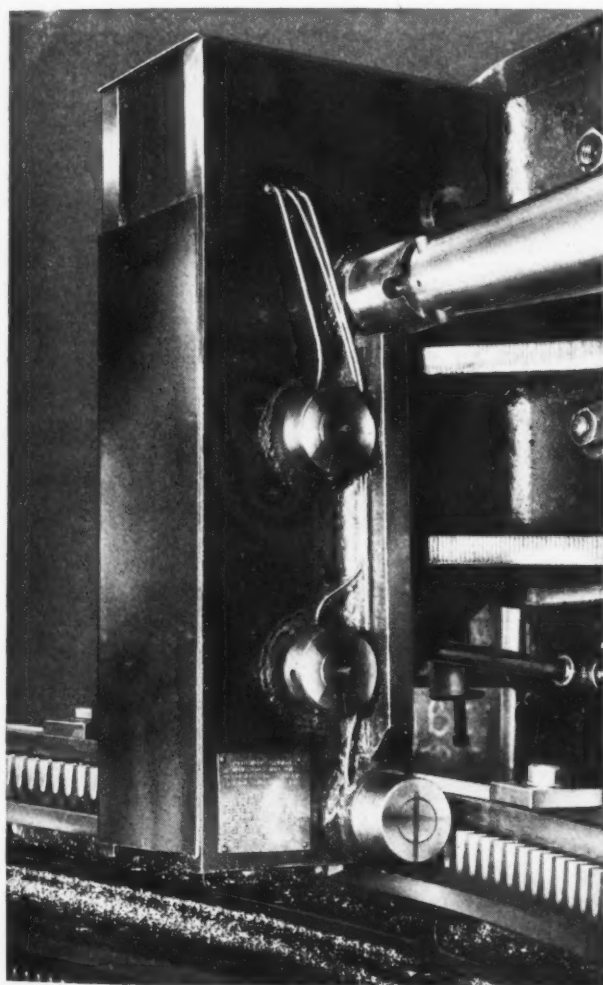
Standard Gear-hobber Equipped with Special Geared Drive for Hobbing Teeth on Internal Gears of Large Diameter
